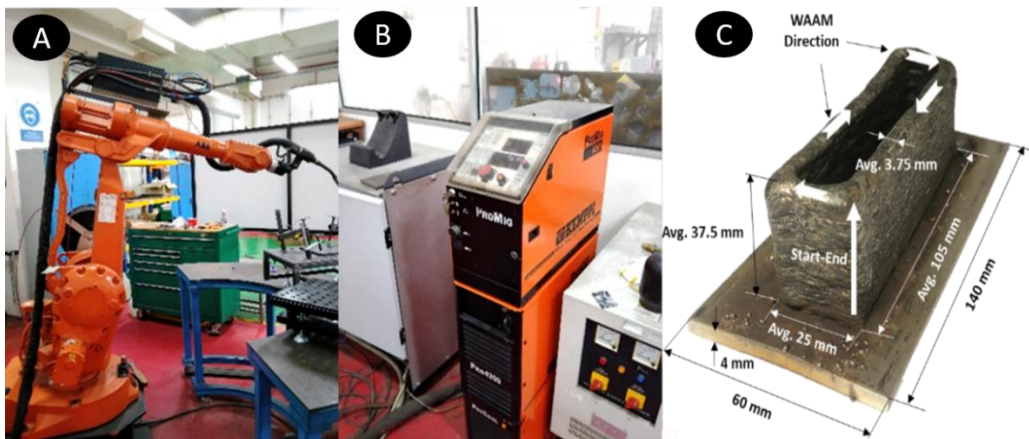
Robotic welding equipment (A), weld power source (B) and final WAAM component (C)
